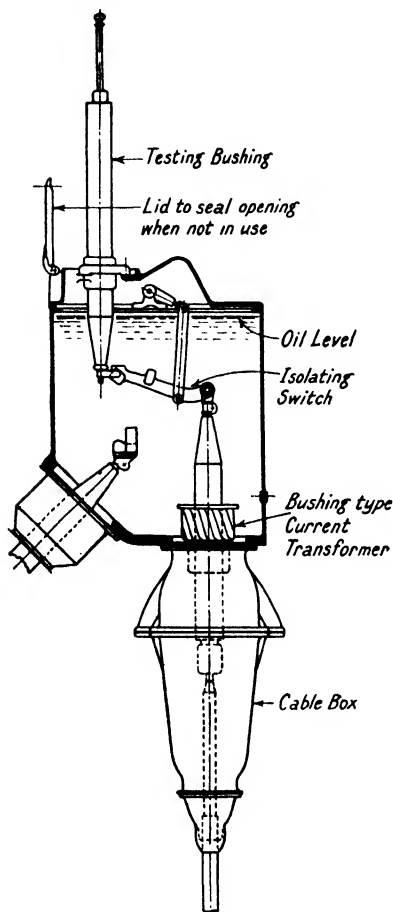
TESTING BUSHING ARRANGED TO TRANSMIT TEST VOLTAGE TO A CABLE
